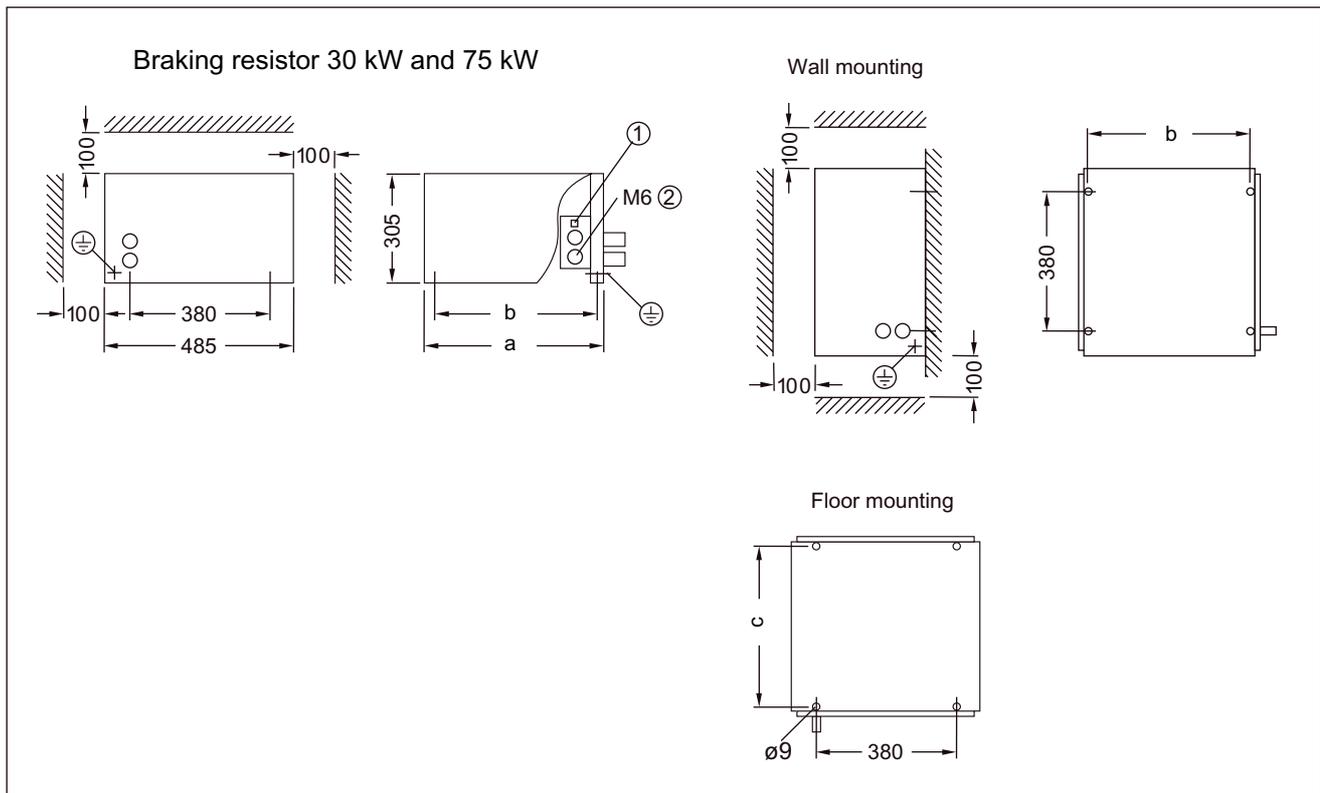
Dimension and installation drawing for braking resistor 30 kW and 75 kW, all dimensions in mm
